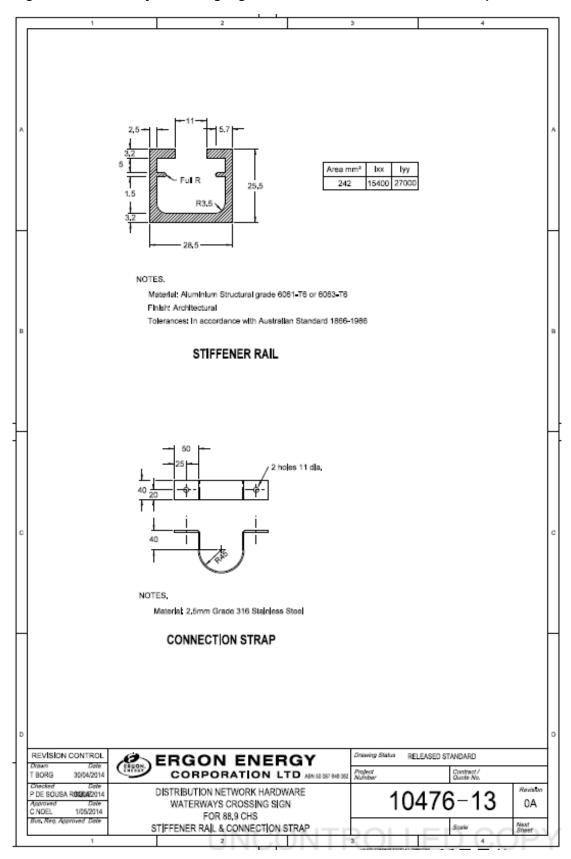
Waterways Crossing Sign - Stiffener Rail and Connection Strap
